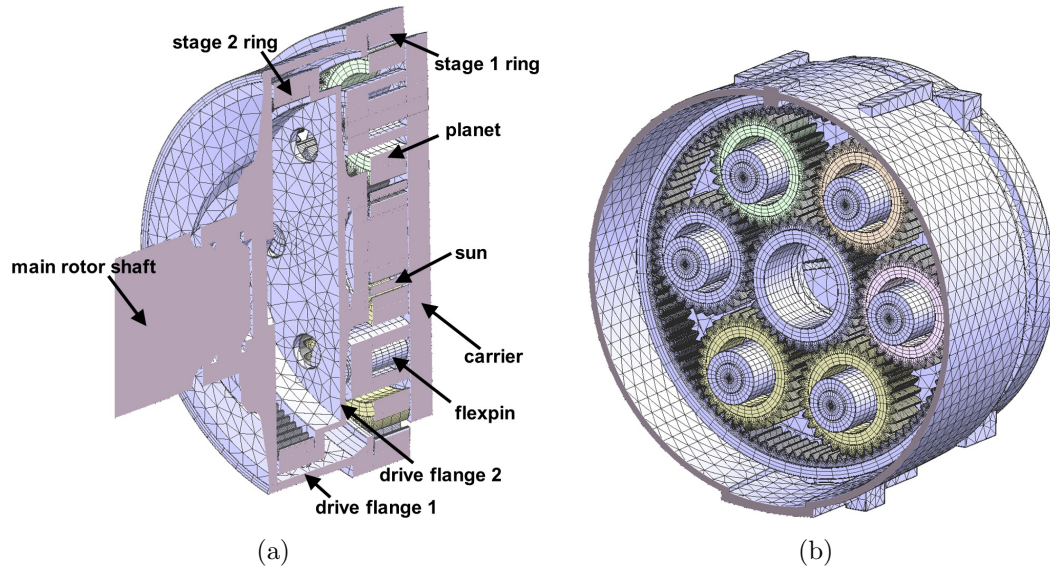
(a) Cutaway view of the finite element model of stage 1 on the W2000, and (b) view of stage 1 from the front of the gearbox.
